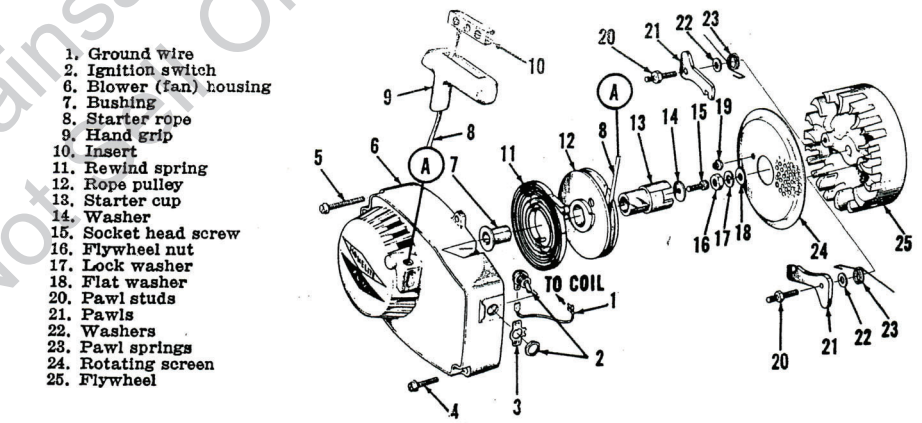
Exploded view of early rewind starter components and related parts. Starter unit is mounted on shaft (starter post) which is an integral part of the blower housing. Refer to Fig. HL42A for late starter assembly.
